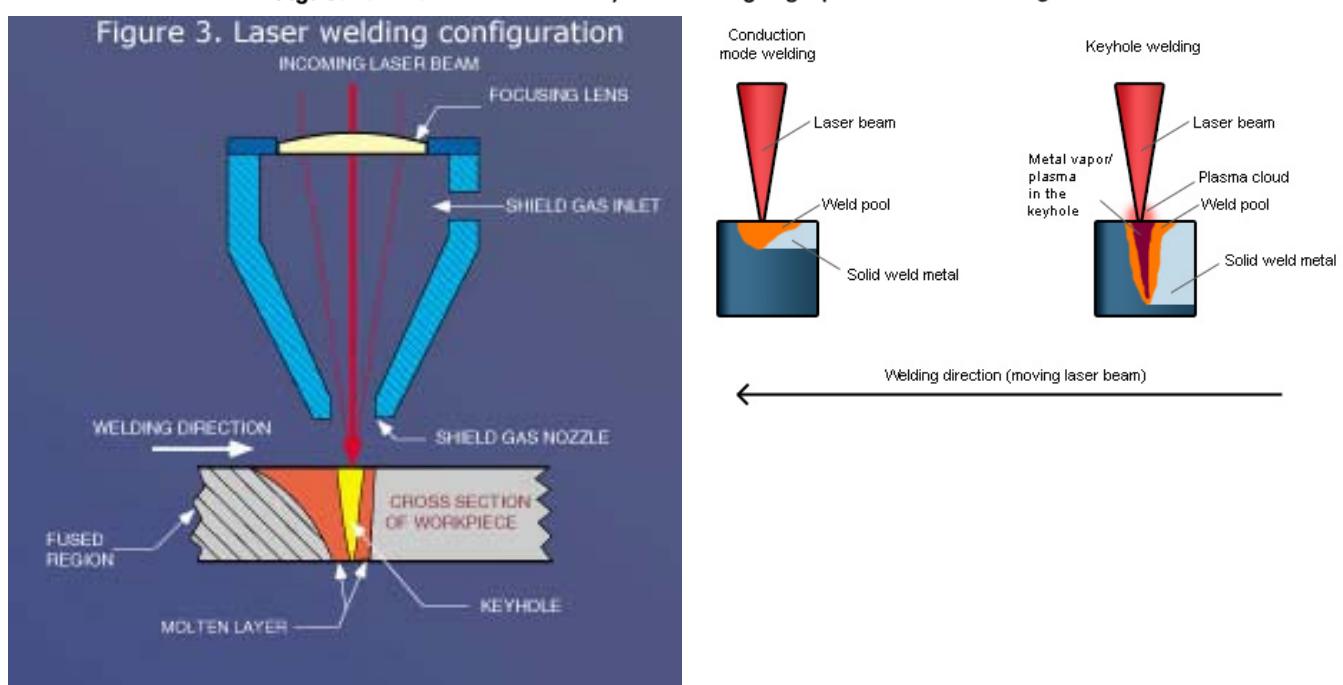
Formation of a 'keyhole' during high-power laser welding.
